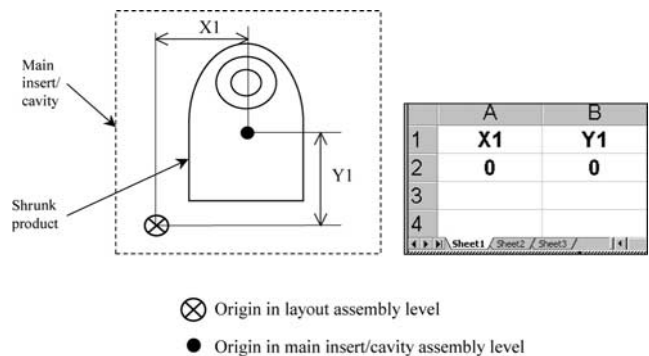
Single-cavity layout configuration and geometrical parameters.
